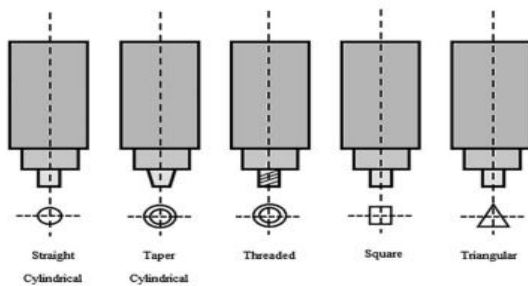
Tool geometry with a different type of tool shoulder and pin profiles
